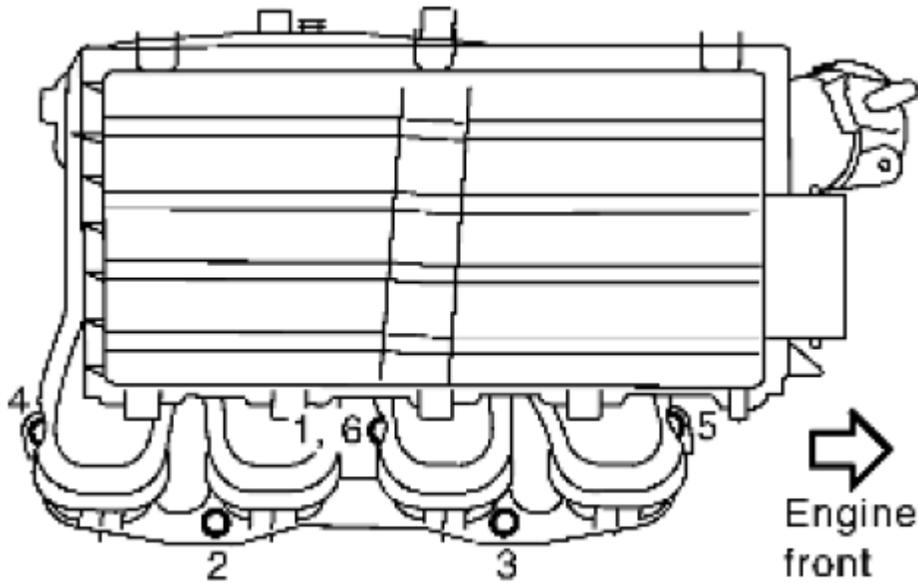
Tightening Order Of Intake Manifold Nuts And Bolts
